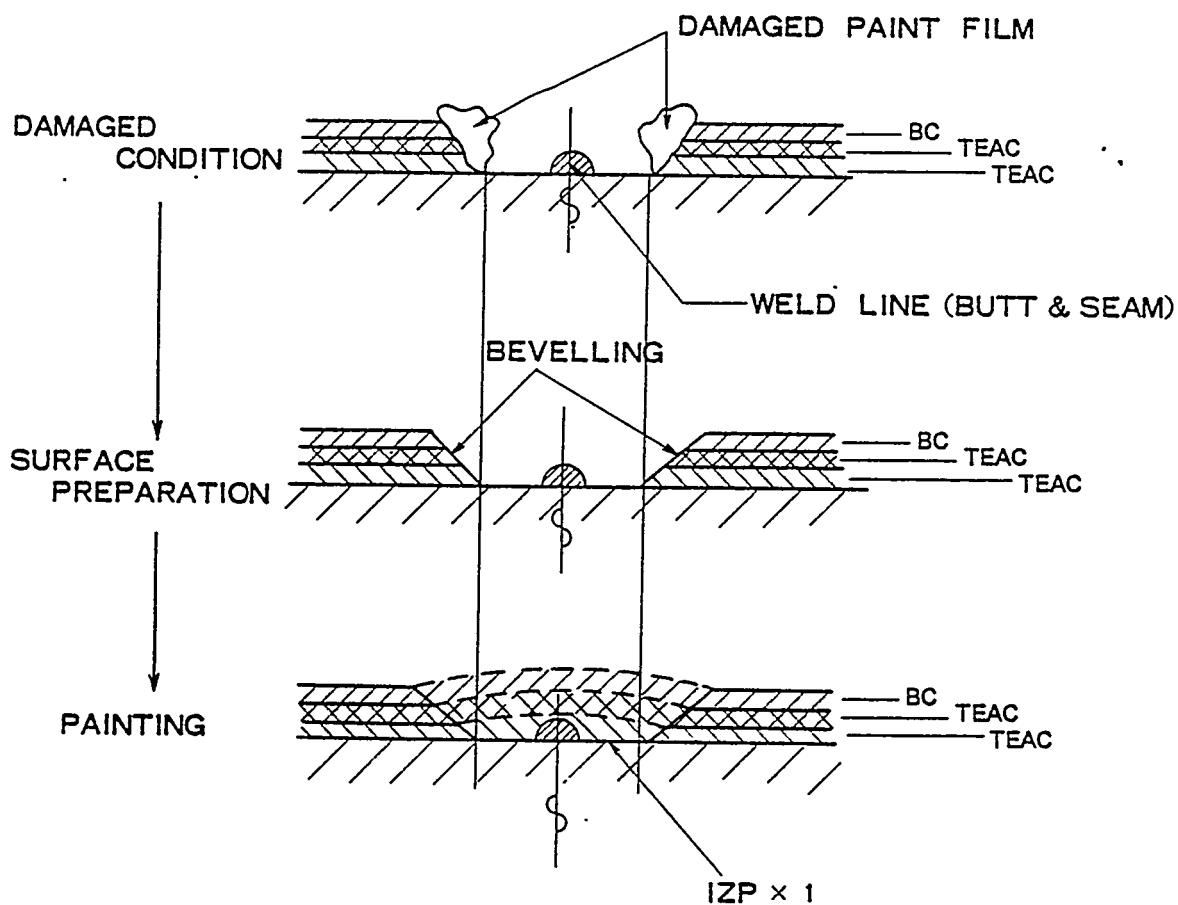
Surface Preparation/Touch-Up on Welded Parts
